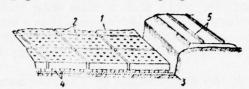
SCHEME FOR THE PLACEMENT OF FORMS FOR CASTING SLAG SLABS IN A CASTING PIT:
